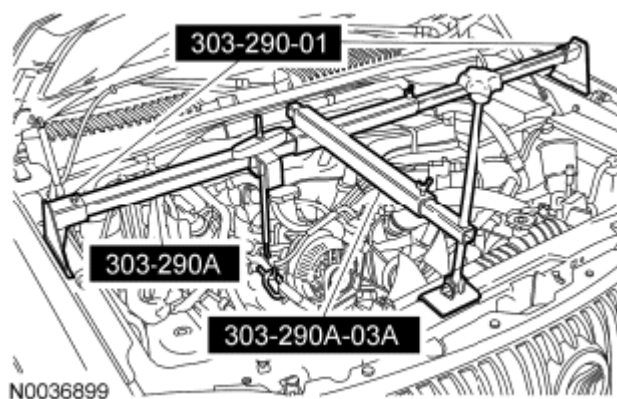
Installing Engine Support Bar And Adapters For 303-290A
